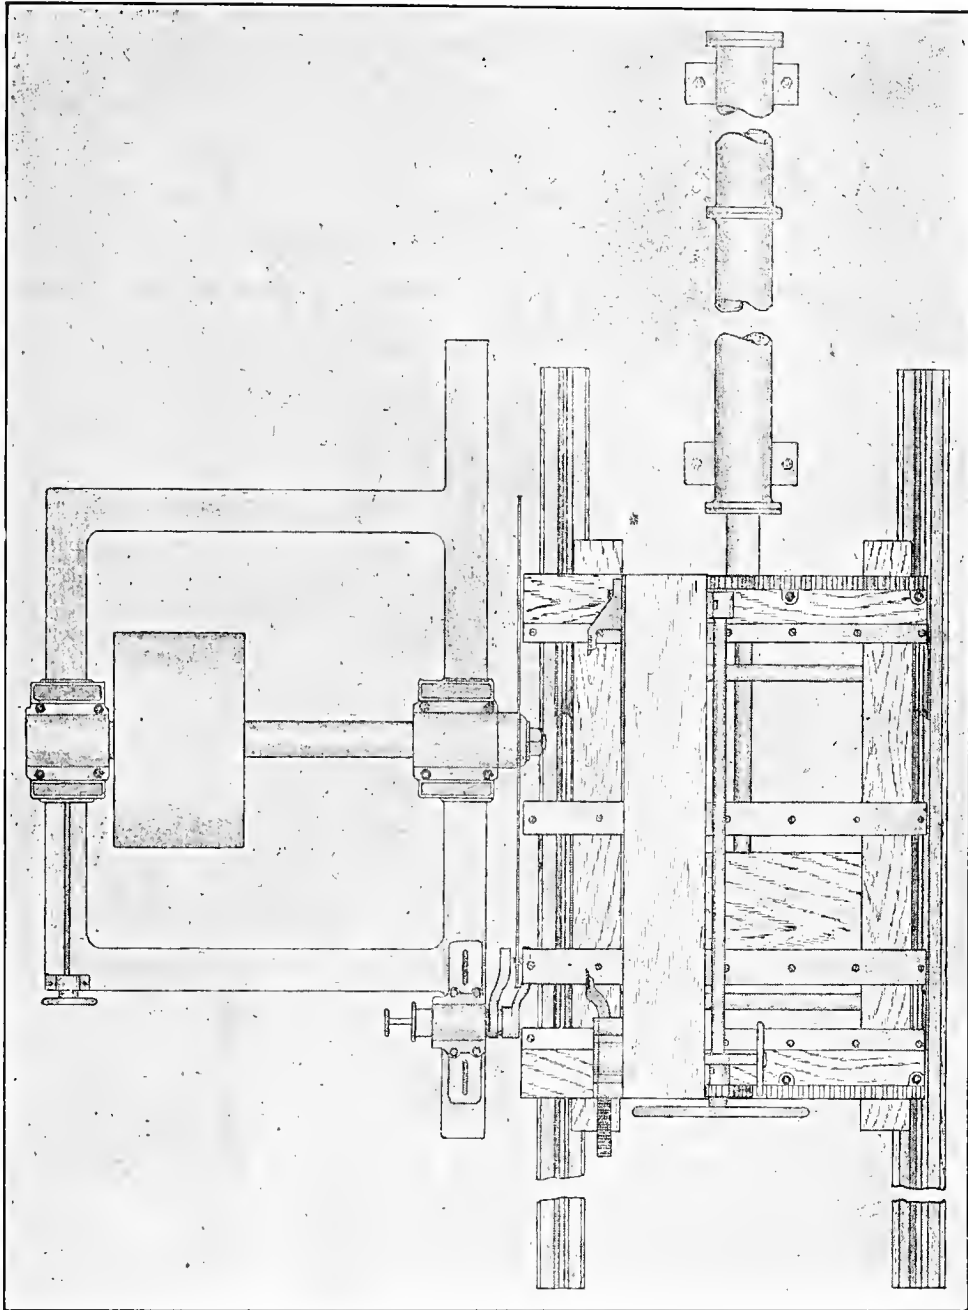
PLAN OF HORIZONTAL BOLTING SAW.
